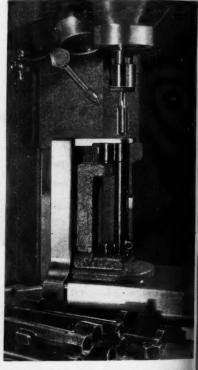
An easy, quick-acting fixture that allies out for loading and in for tapping. The warpiece is a steel gas cylinder which is a caponent part of an Army rifle. The tap is inch, 32-thread, four flute, two-thread chass.
